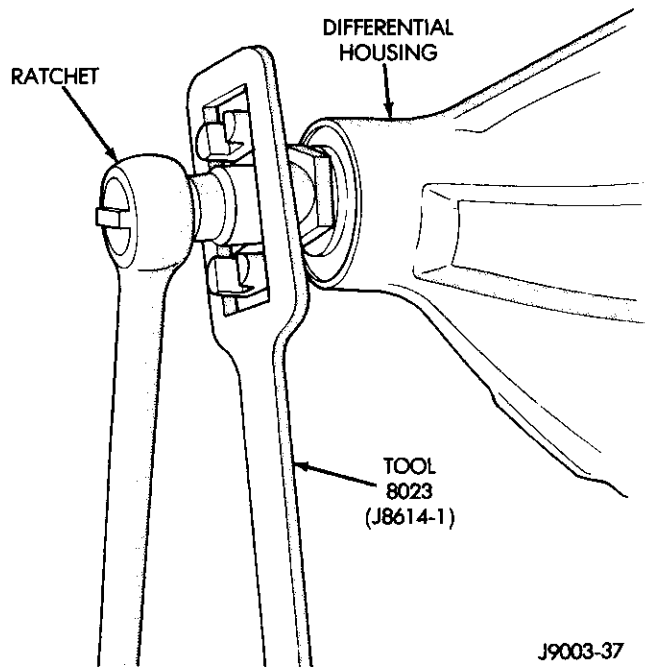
Drive Pinion Gear Shaft Nut Removal
